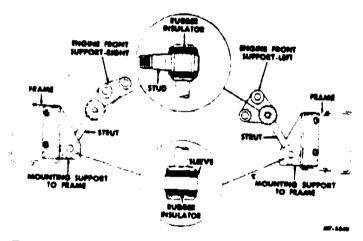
Strut Type Engine Front Mounting For Chassis With Box Frame.
